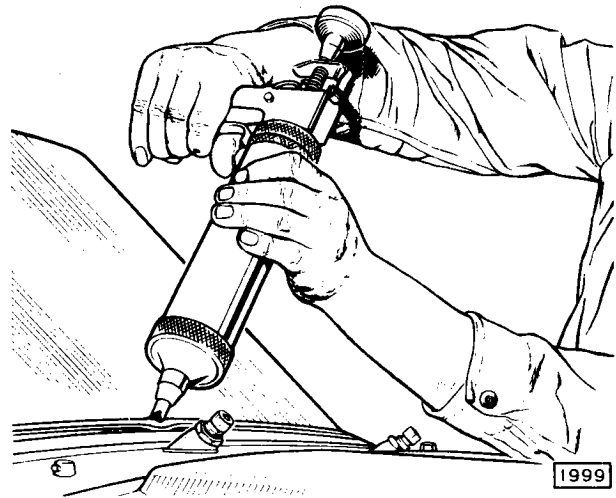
Using a gun to inject sealing compound between the surround and the glass
